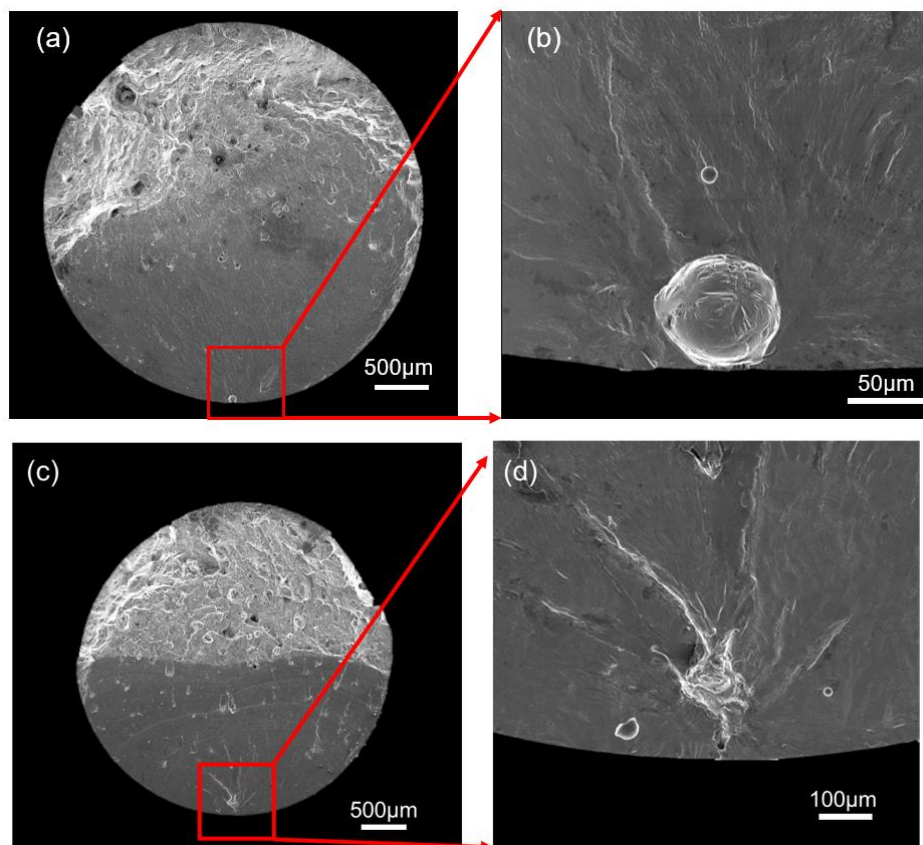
presents the fatigue fracture surfaces under lower cycle conditions, where large unmelted defects are the primary source of crack initiation. In the high value of maximum stress or LCF regime, fatigue cracks tend to initiate from multiple un-melted defects located at or near the surface of the specimens. As shown in the figure, cracks begin to propagate from un-melted defects on several different planes, and as the cracks grow, "ridges" formed by the coalescence of fatigue cracks on different planes can be observed. As the cracks merge, the crack propagation area expands instantaneously. It is evident that the crack initiation mechanism is influenced by the interaction between the maximum stress and surface AM defects. Due to the higher stress levels, multiple cracks simultaneously reach the threshold of the stress intensity factor, leading to concurrent crack propagation [74,75].
